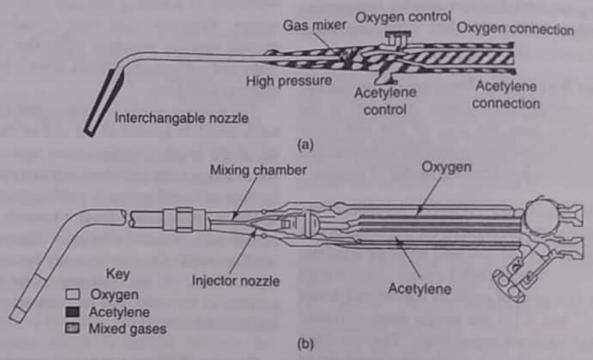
(a) High pressure blowpipe and (b) Low pressure welding torch (blowpipe)
